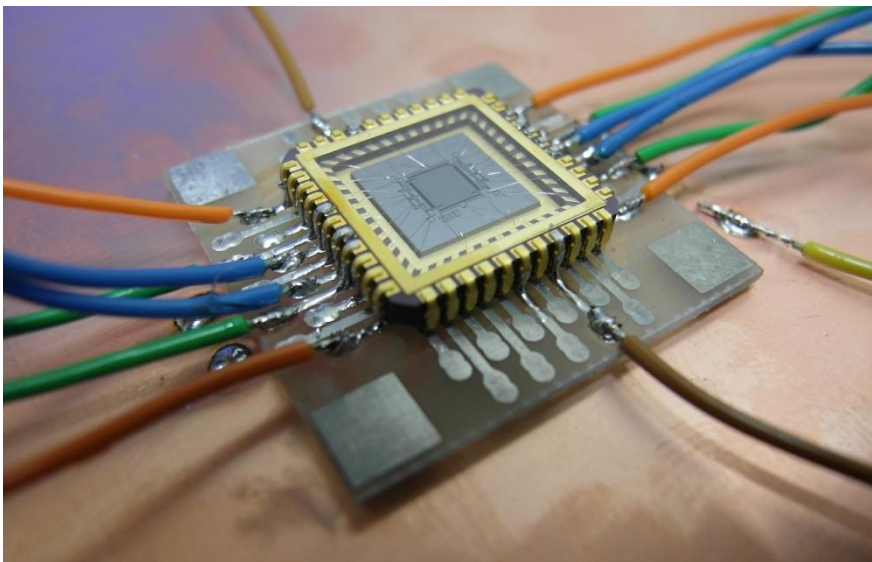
wire soldering on bread board as measurement method before the electronic chip board was finished.
